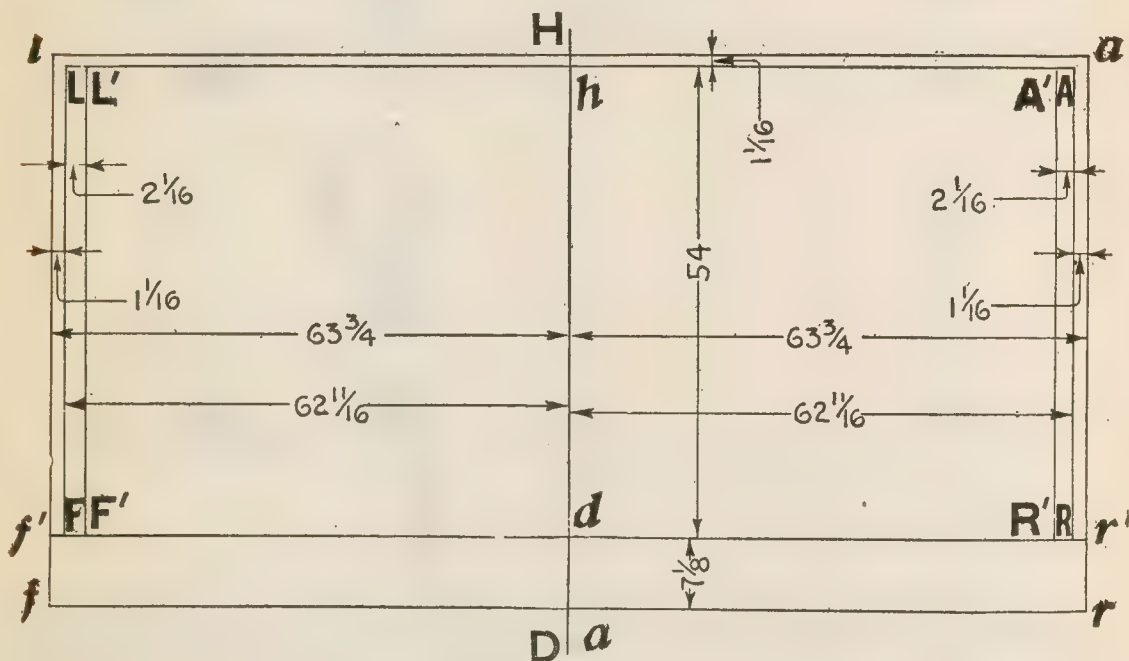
,722.—Lines of the shell layout with dimensions illustrating the spacing of rivets.
